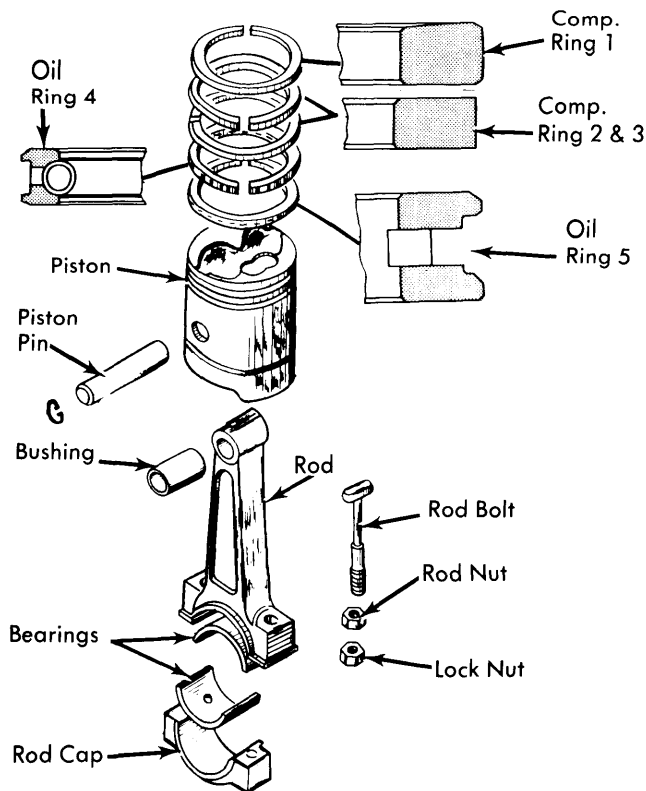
Exploded View of Piston & Rod Assembly with Piston Ring Placement
